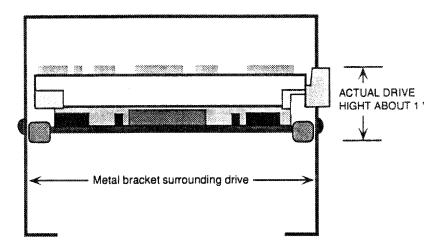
Profile view of an 800K drive in the mounting bracket. It takes up about half the room as a 400K drive
